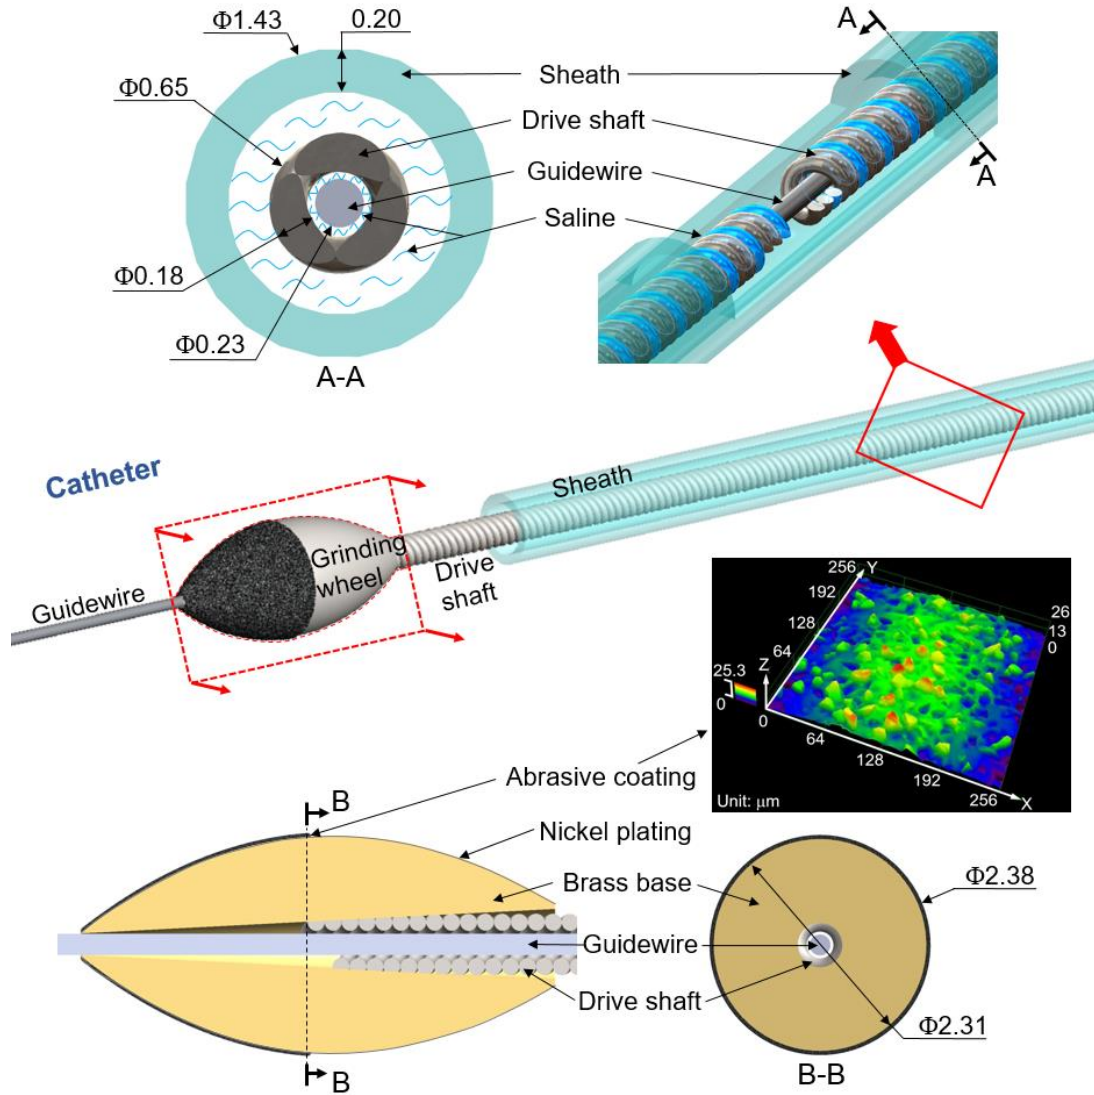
RA catheter components and dimensions. (unit: mm)
